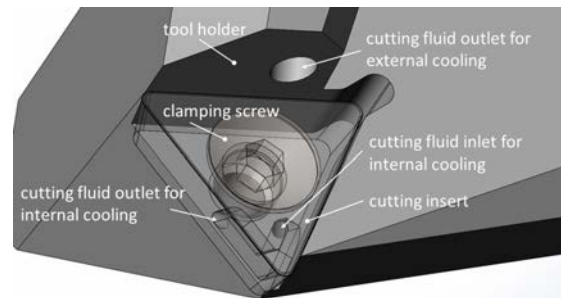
Tool holder with assembled EDM machined cutting insert.
